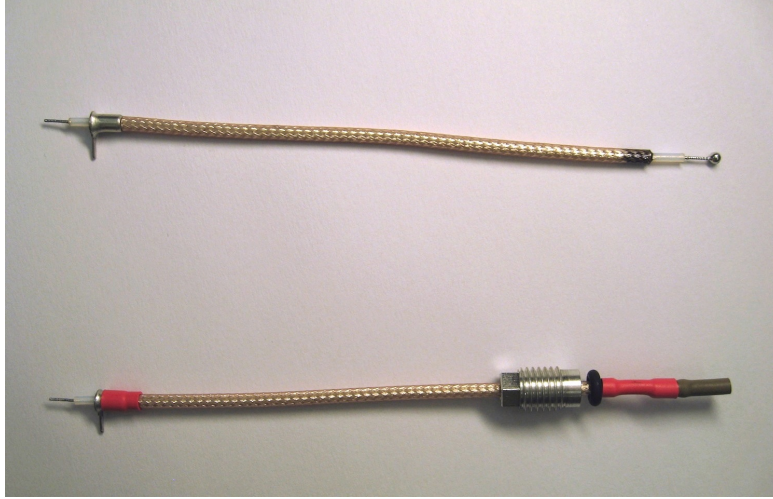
Two hookup wires, the upper wire is part-assembled and the silver bead is visible.
